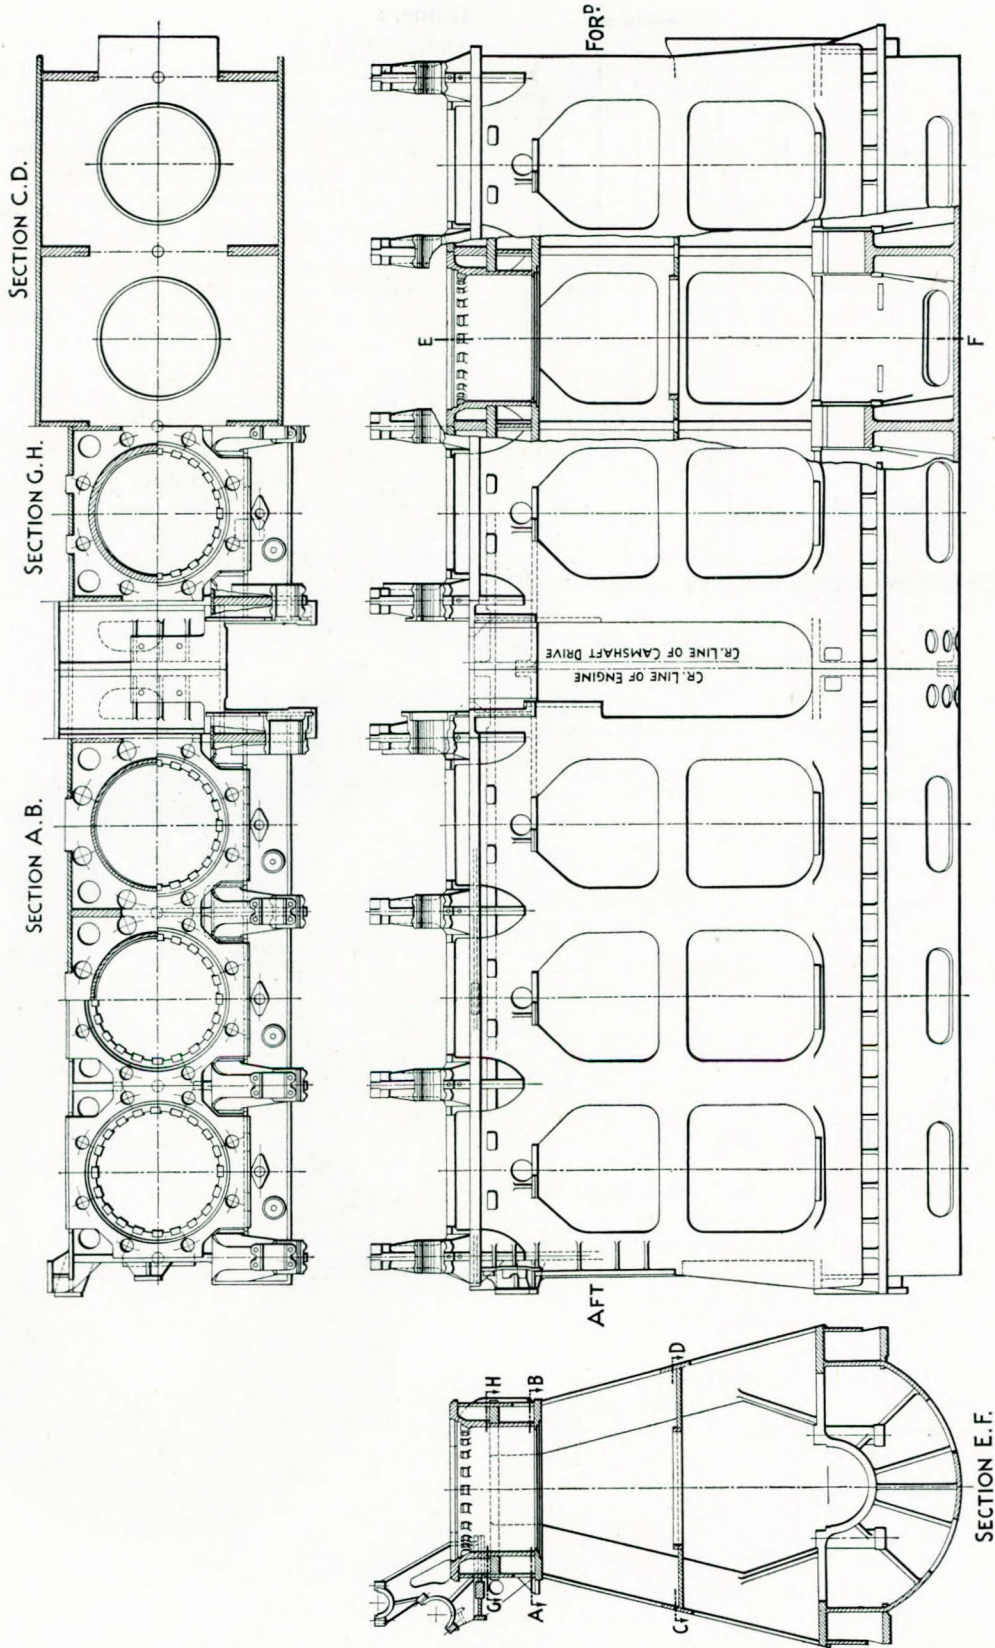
Line drawing of front elevation, end elevation and sections.
